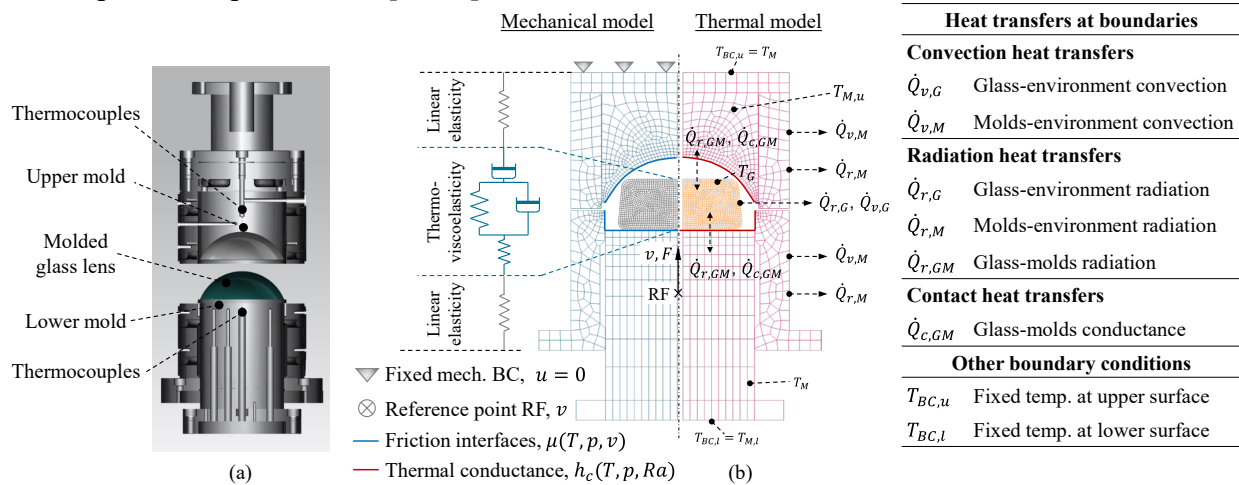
(a) Setup and molding components, and (b) coupled thermal-mechanical model of the NGM process [12].
